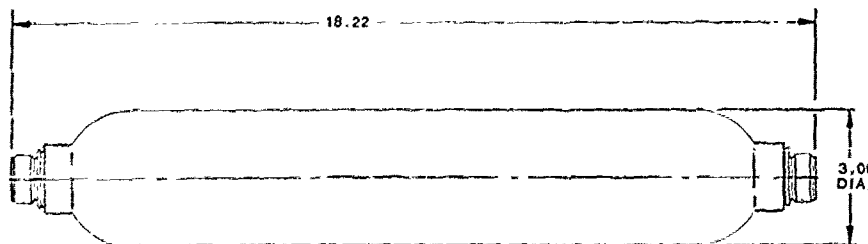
Pulsco - Acoustic Filter Outline Drawing
